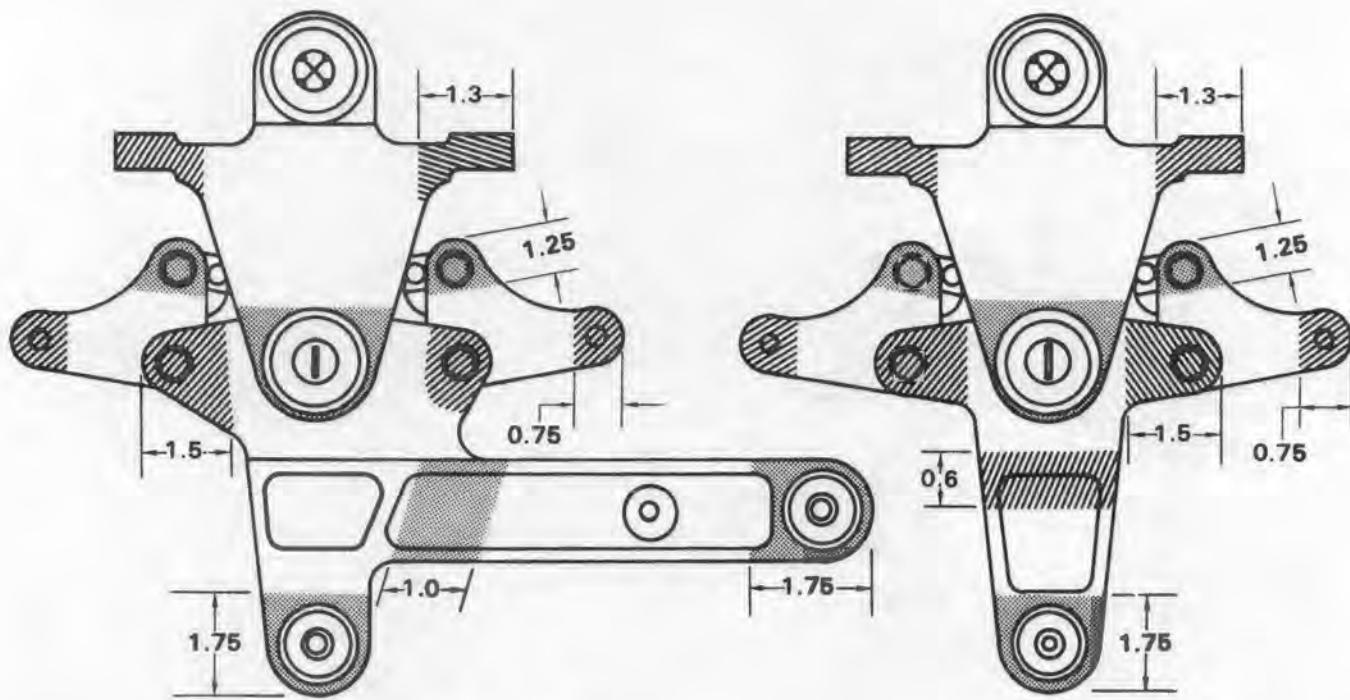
Adjuster assembly — tail rotor controls — disassembly and reassembly (Sheet 1 of 2)
